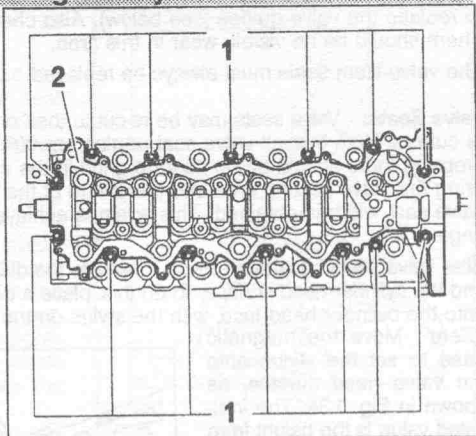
The location of the camshaft bearing housing bolts (1). The housing is removed upwards.
